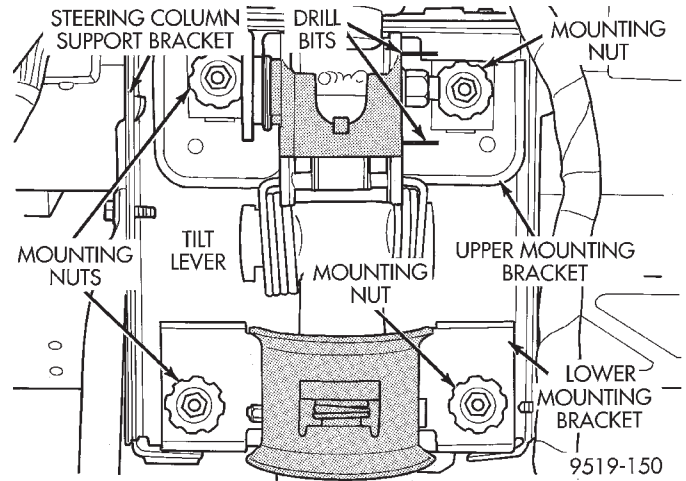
Steering Column Upper And Lower Mounting Bracket Nuts
